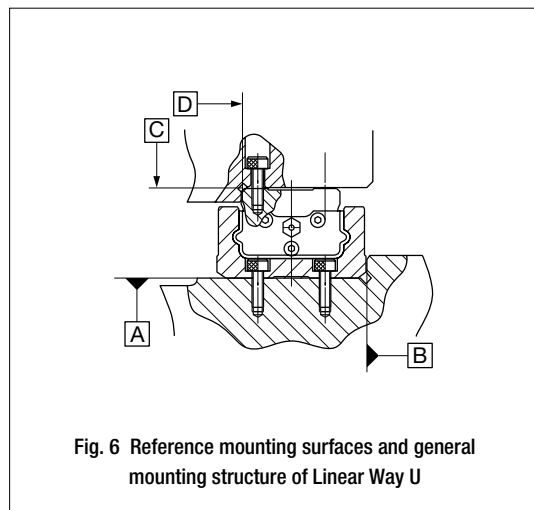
Reference mounting surfaces and general mounting structure of Linear Way U
